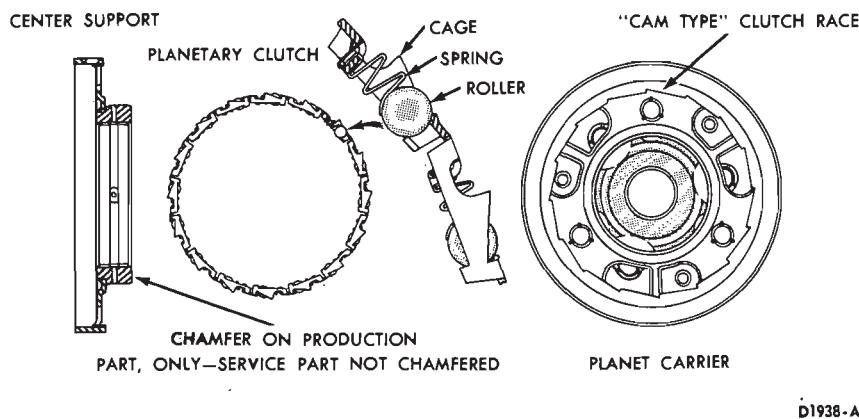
Planetary Clutch, Planet Carrier and Center Support
